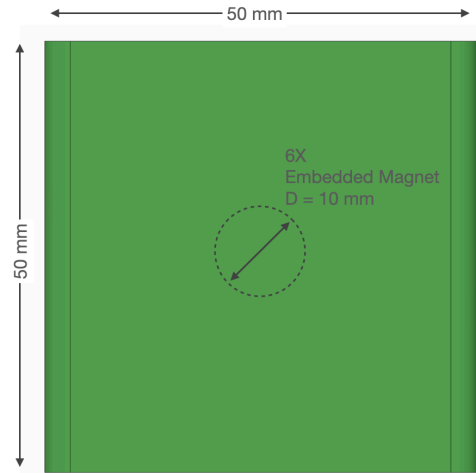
CAD Drawing of an CRATE. Dimensions are in cm. All dimensions are ± 0.2 cm.
